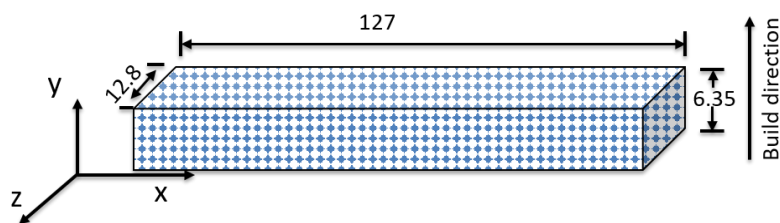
SLM built rectangular block sample with dimensions in (mm)
